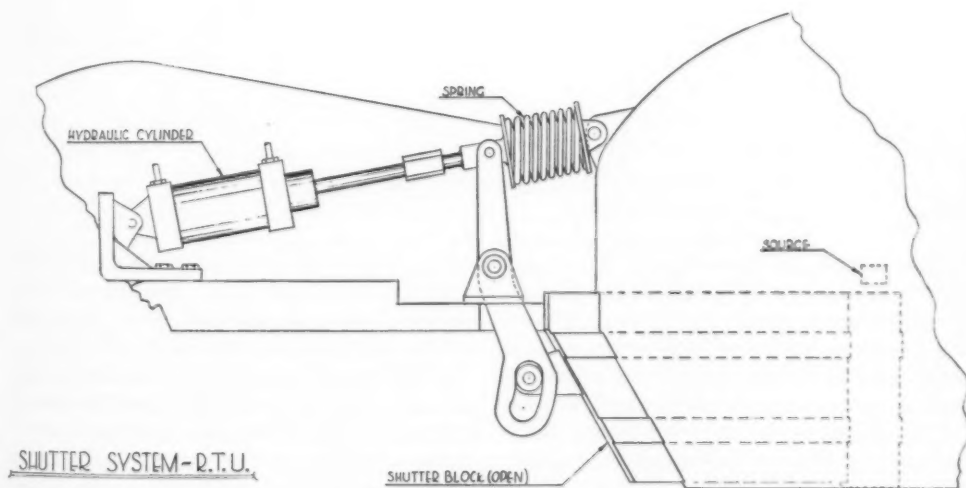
Shutter system. The shutter opens against a strong spring which supplies the closing force should the hydraulic system fail.
